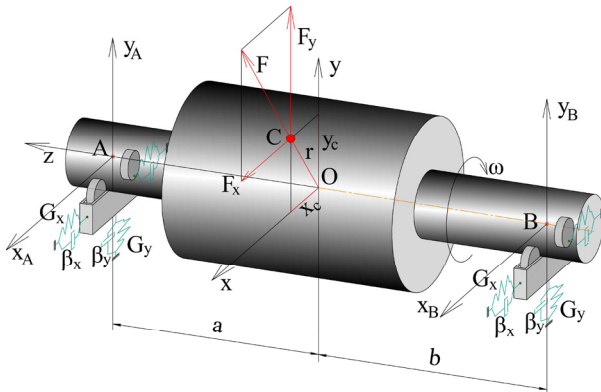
Calculation diagram of balancing on a balancing machine with roller supports
